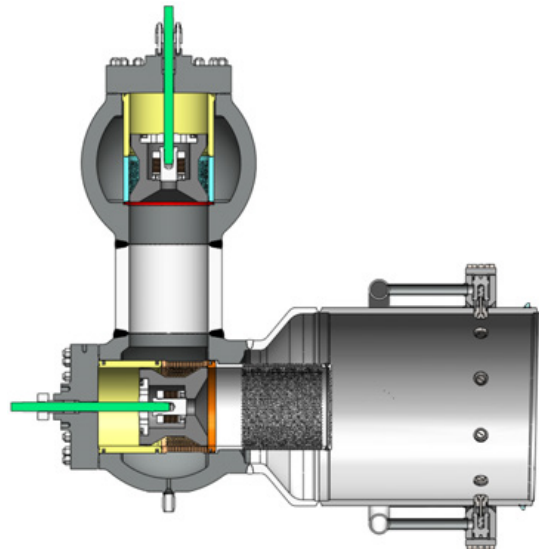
Pressurized seat design & Spherical Valve designs for LP/HRH bypass steam control valve to condenser
